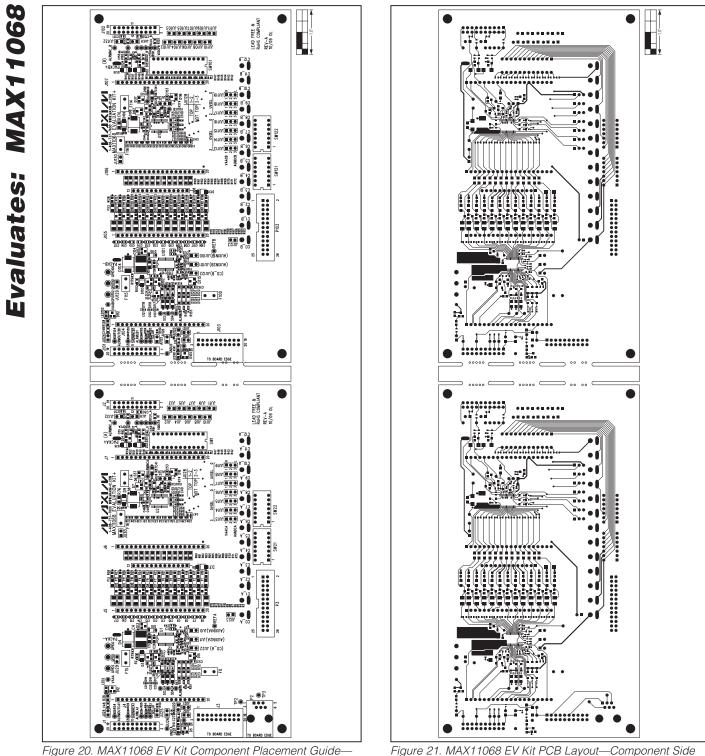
MAX11068 EV Kit Component Placement Guide— Component Side
